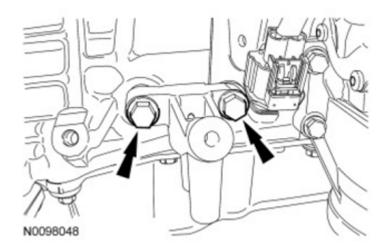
Locating Bolts And A/C Compressor Bracket Courtesy of FORD MOTOR CO.
